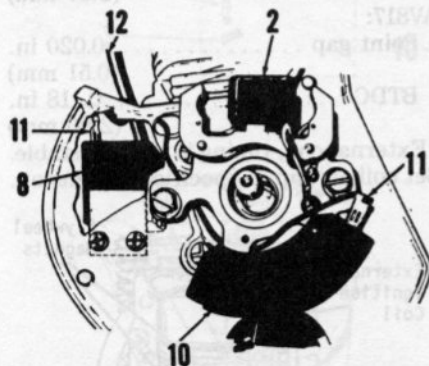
The solid-state ignition charging coil, triggering system and mounting plate (2 and 10) are available only as an assembly and cannot be serviced.
